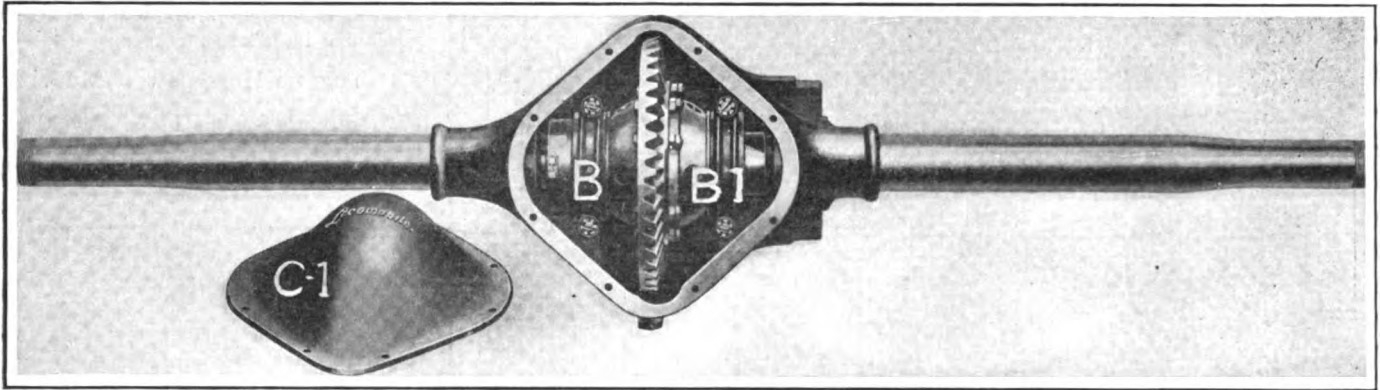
View of the new live rear axle fitted to the Locomobile six with cover removed
